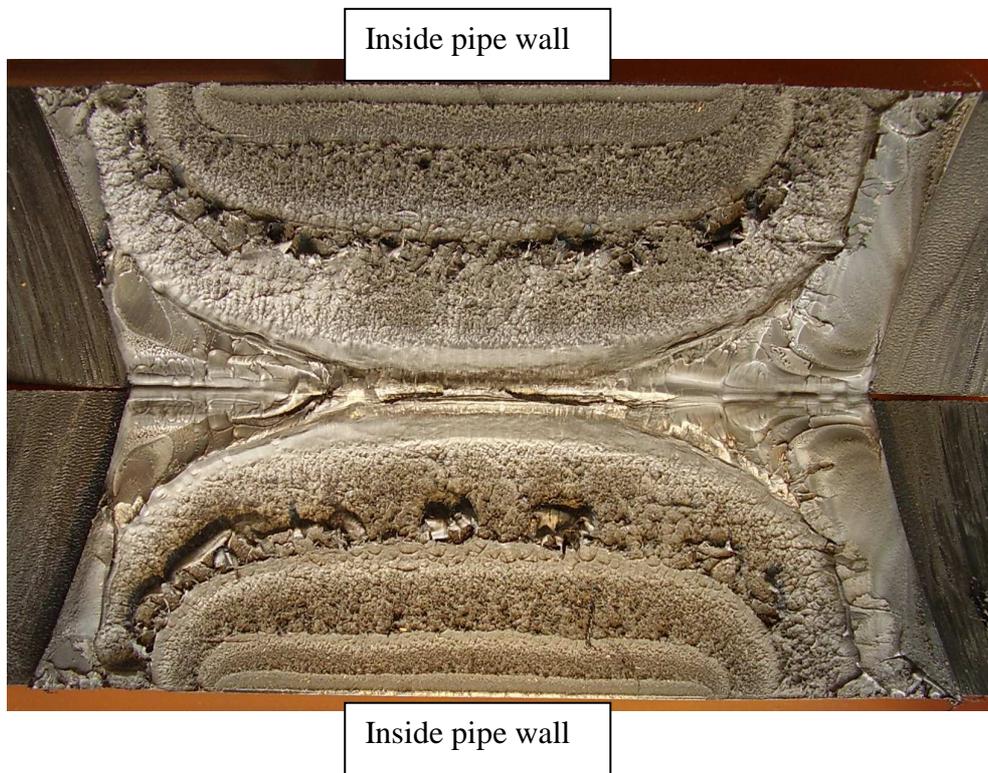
Brittle fracture surfaces of a pipe after internal pressure test
